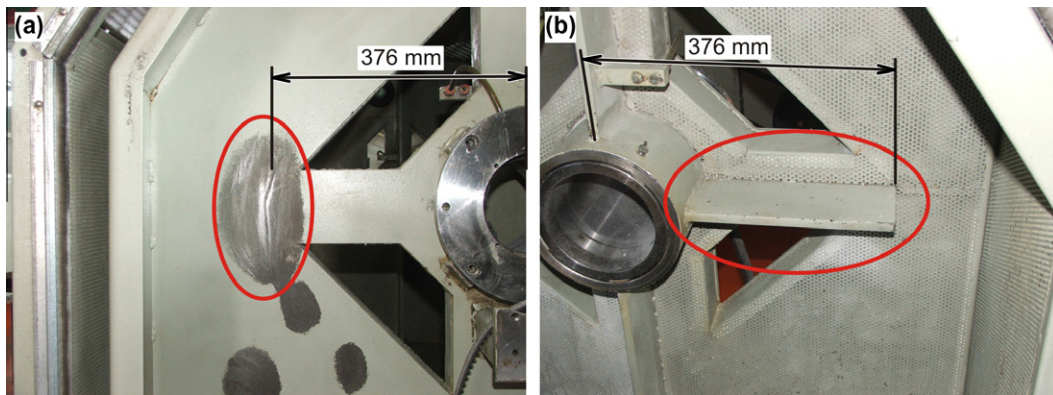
Typical cracks in zone "E2" on the twisting machine foundation framework. (a) Lateral side, view "P2" (from Fig. 1b). (b) The zone of shortened reinforcement rib on the internal side, view "P1" (from Fig. 1b).
